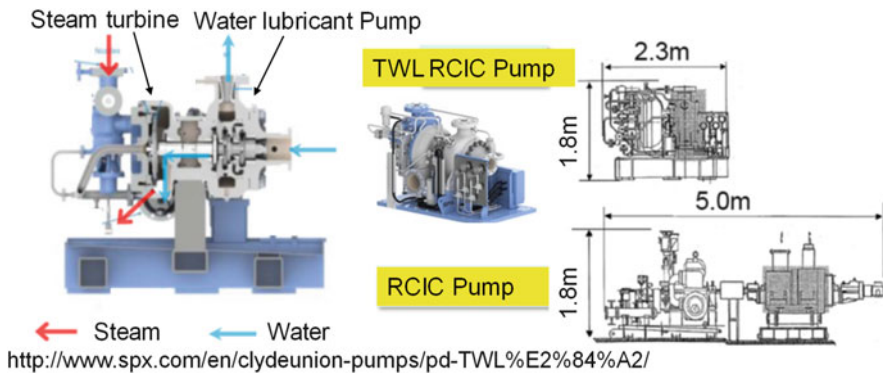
TWL-RCIC using a steam turbine-driven water-lubricated pump [19]
